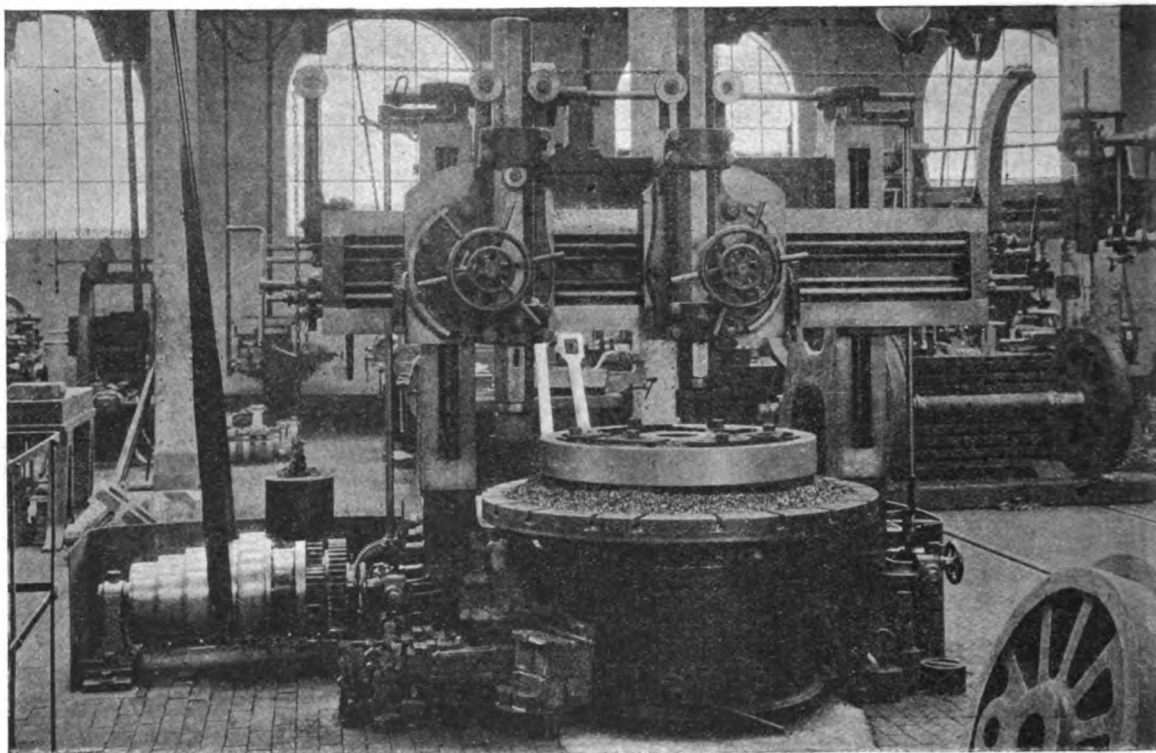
SHOWING HORIZONTAL TURNING AND BORING MILL: MESSRS. PECKETT & SONS' WORKS, BRISTOL.
